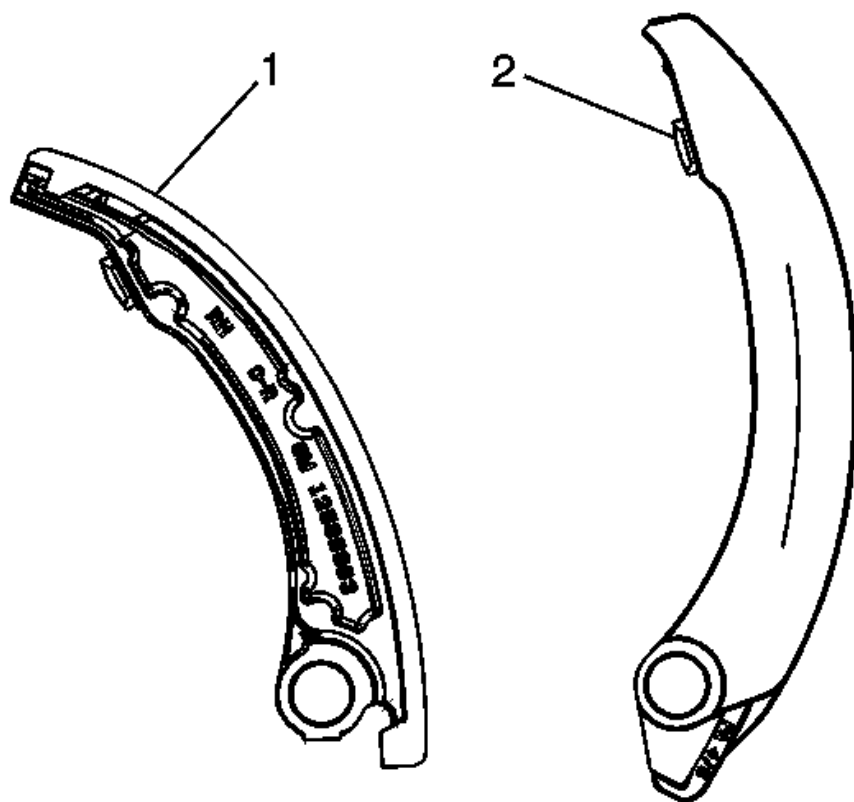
Identifying Right Secondary Camshaft Drive Chain Shoe
